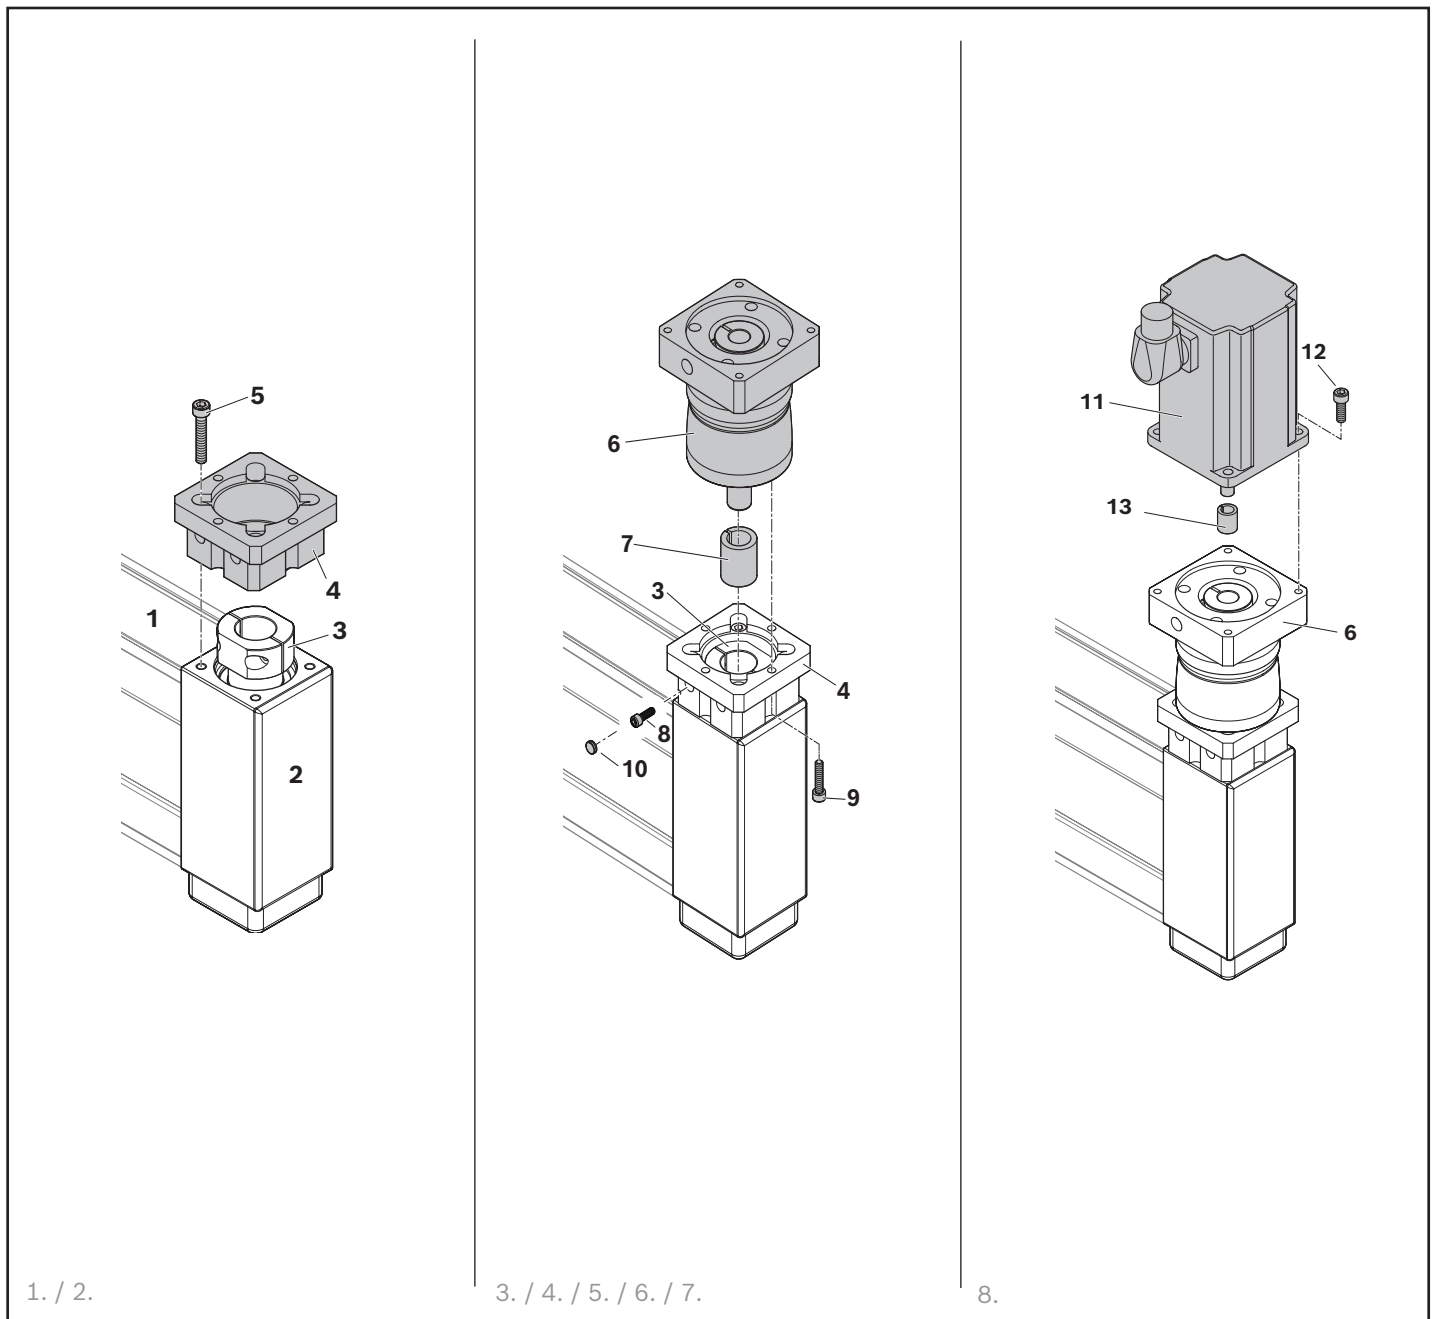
Gear attachment CKR-070/-090/-145/-200 (PG090)
